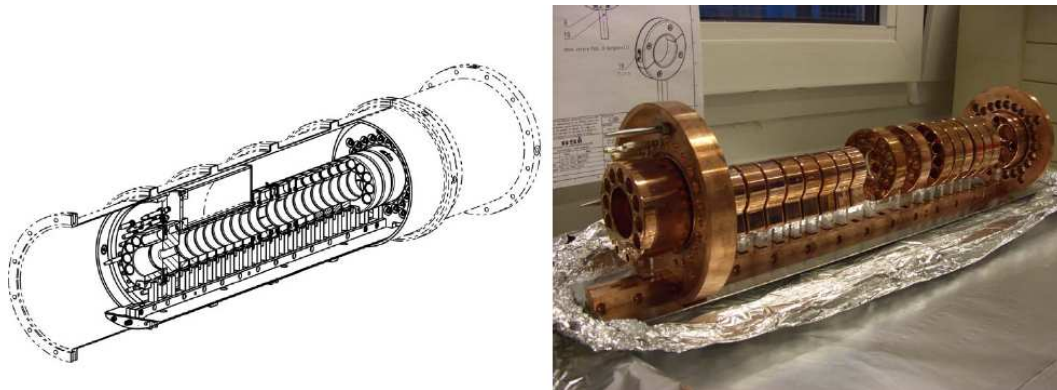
Technical drawing and photo of 25 stacked electrodes for the Cooler Trap.
